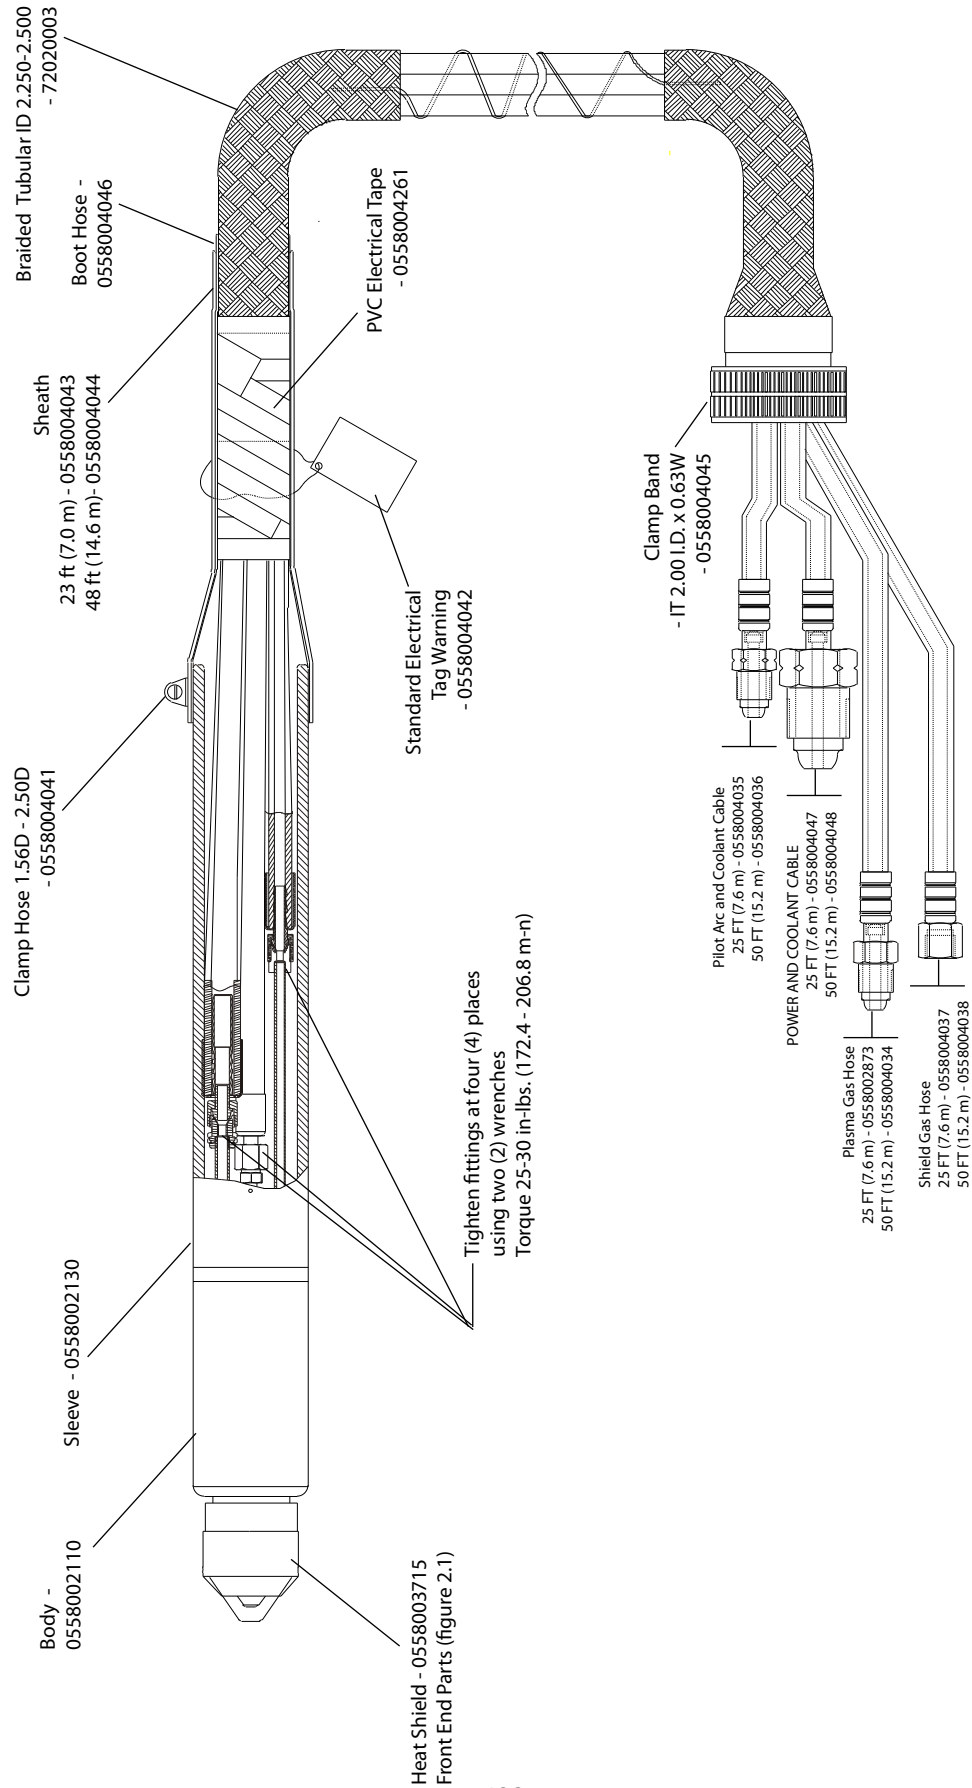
Replacement Parts - PT-26 In-line Torch Assembly
